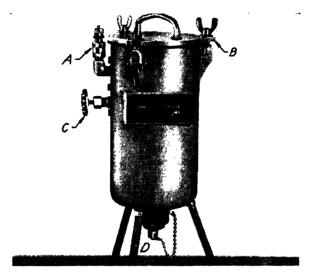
A powder dispenser for powder cutting: A. Air pressure release (25 lbs. per sq. in. max), B. filler cap, C. air-in valve, D. flux-out connection (Courtesy of: Linde Air Products Company)
